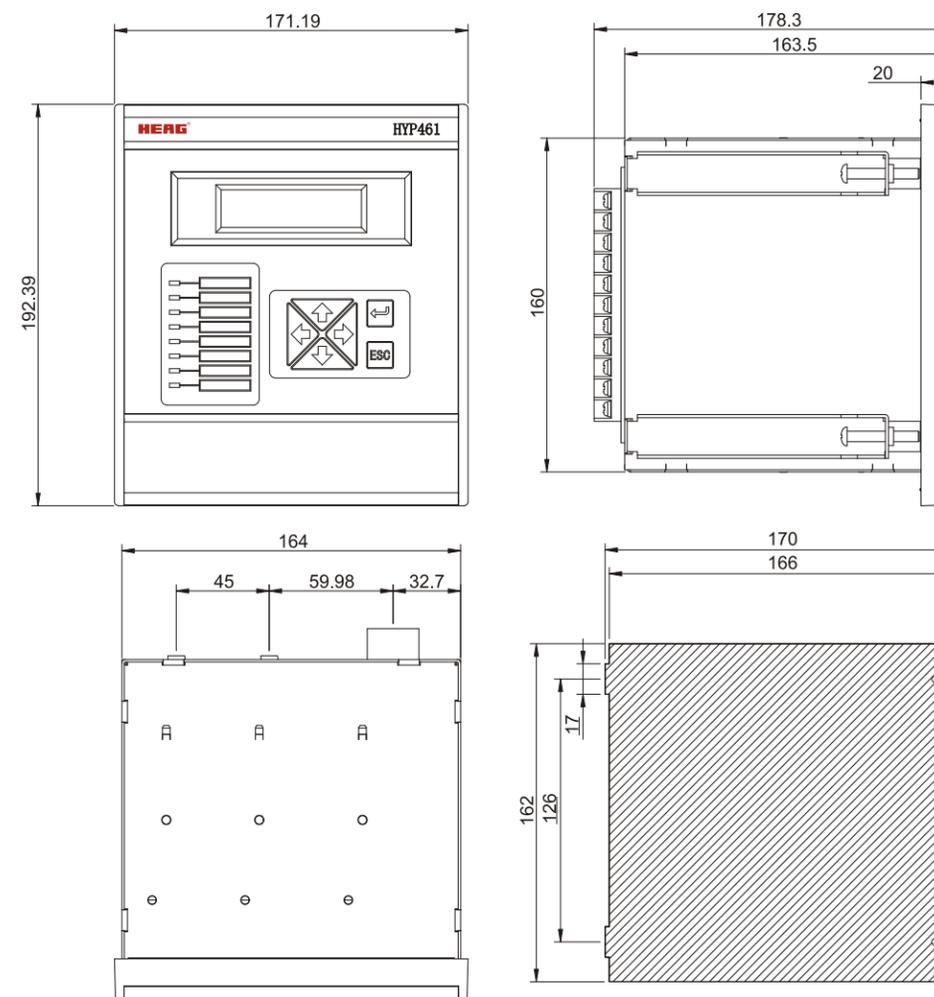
Outline & Installation Dimension of ACR Relay(unit: mm)
